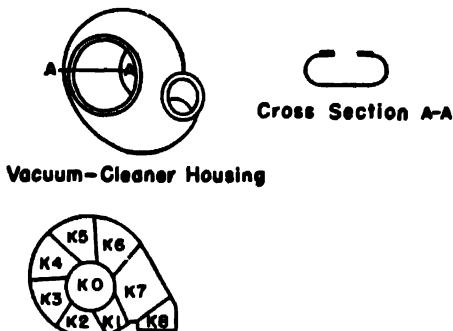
Collapsible core used for casting a vacuum-cleaner housing.
